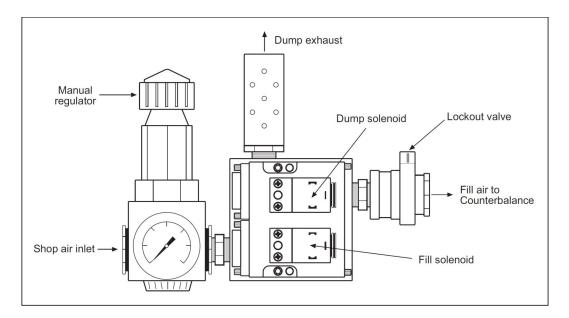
Counterbalance/Cushion Valve Package: Components
